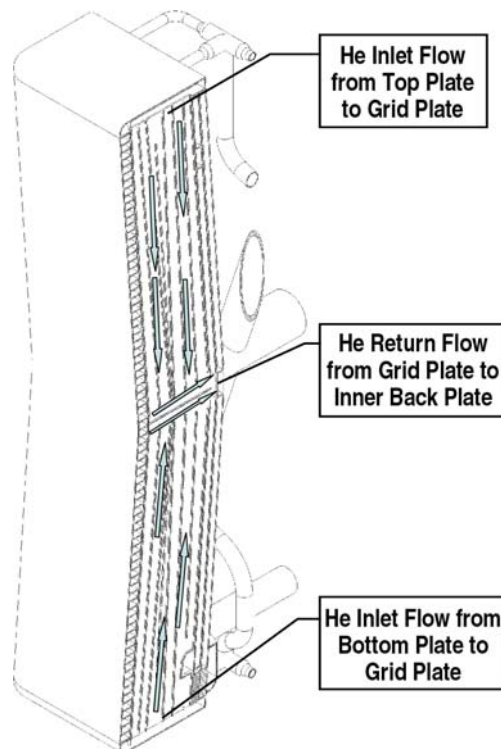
Section view through the grid plate showing the He flow from the top and bottom plates.
